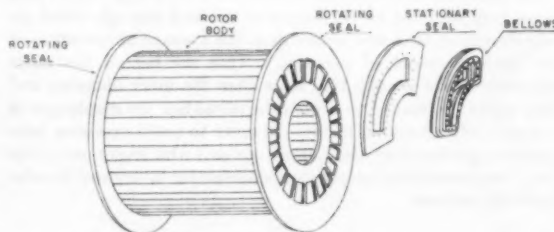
SCHEMATIC EXPLODED VIEW OF SEAL ARRANGEMENT
